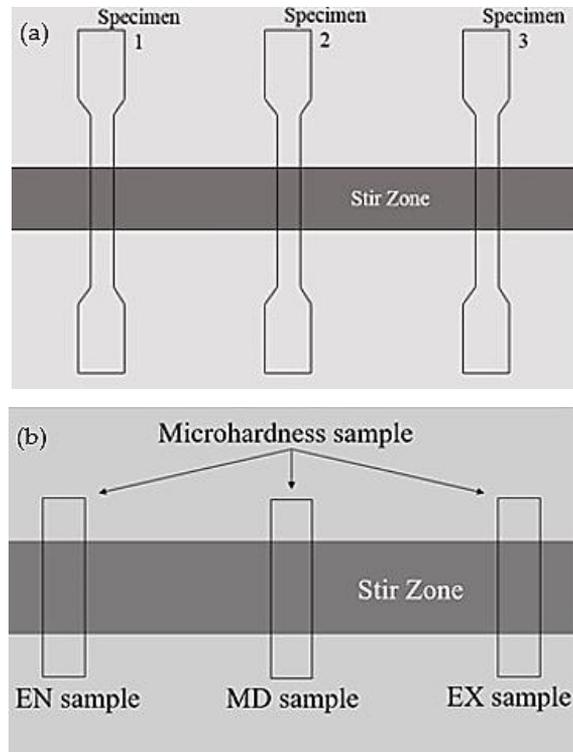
Arrangement of the specimens from the welded part using BFSW technique: (a) tensile specimens and (b) microhardness specimens
